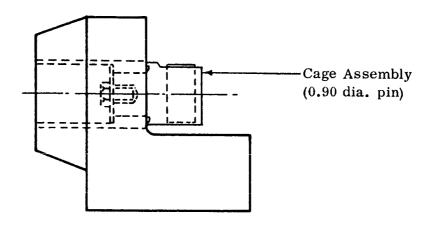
BEARING CAGE TEST BLOCK (INSTRON)
